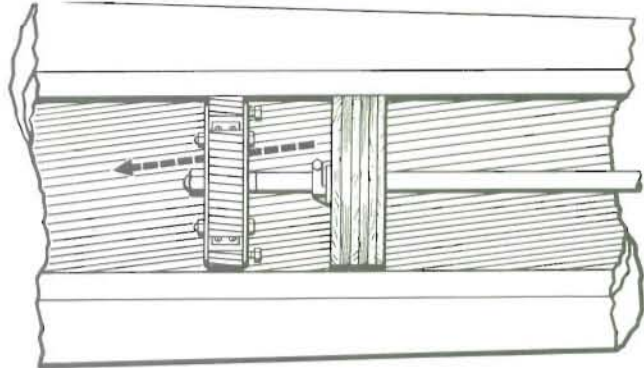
Use of Bore Lapping Head in the Care and Preservation of Gun Assemblies
